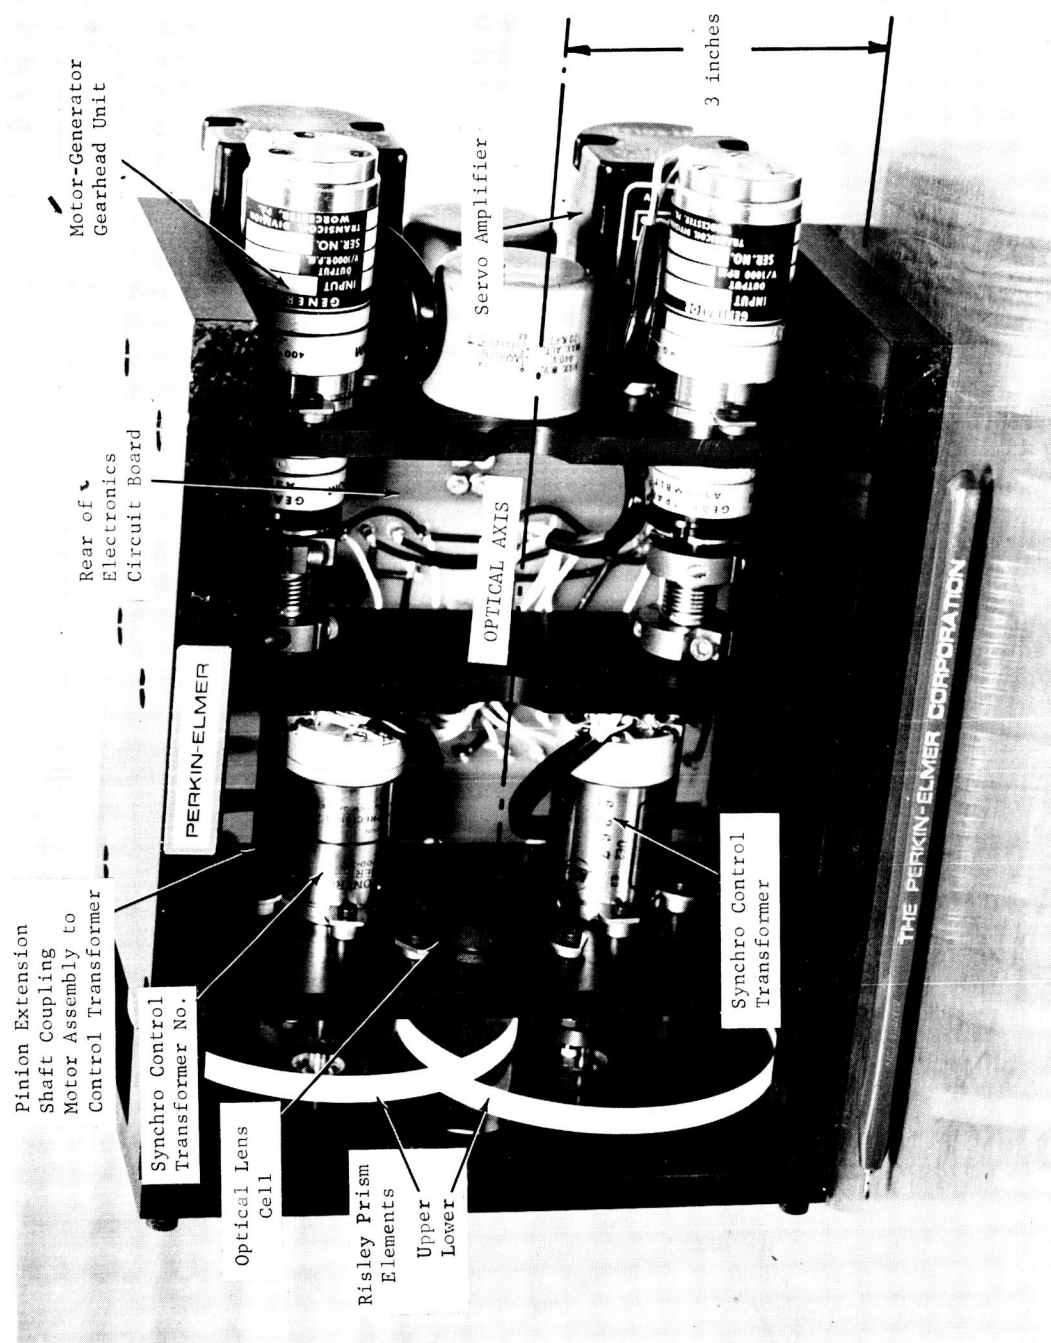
Transmit Beam Offset Subsystem and Mechanical Subassembly
